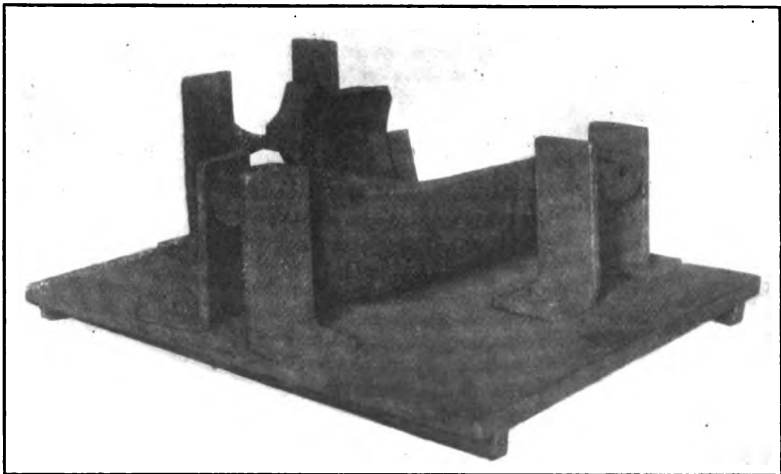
PASTING JIG SHOWING SECOND SECTION OF CORE IN PLACE
